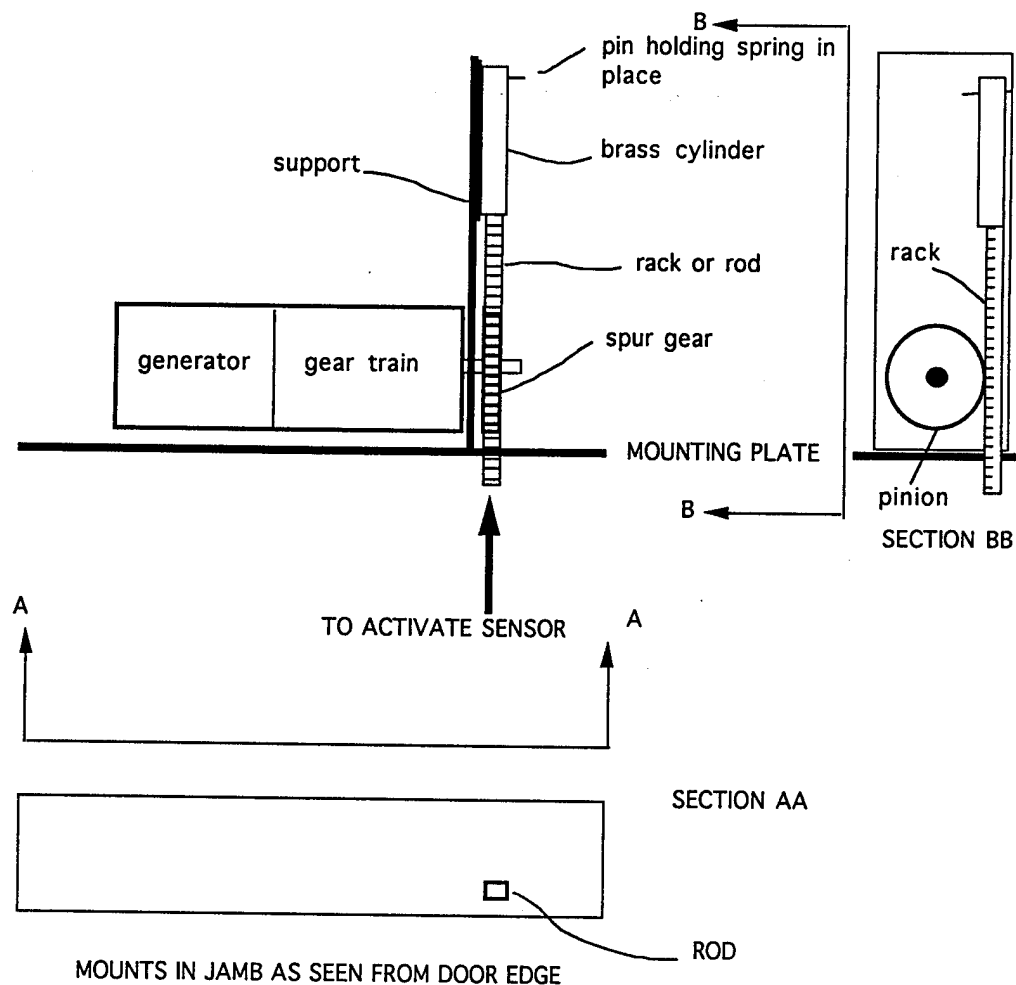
Improved rack and pinion version of Batteryless Sensor.
